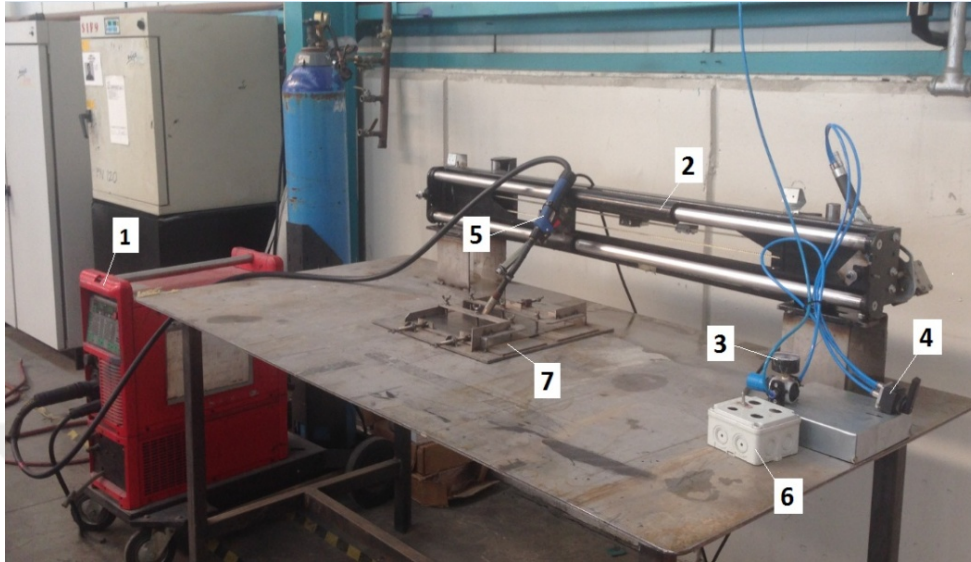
Components of the automated welding system used for experimental work. (1) Frounious Transpuls Synergic 2700 Welding Power Supply, (2) Pneumatic Welding Automation Mechanism, (3) Pneumatic Valve To Control Welding Speed, (4) Pneumatic Valve To Control Welding Start/Stop and Direction, (5) GMAW Torch, (6) Welding Arc Start/Stop Control Panel and (7) Welding Fixture
